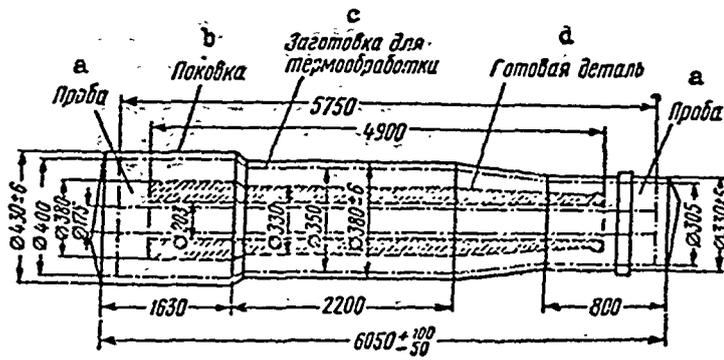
Forging and stock for heat treatment and finished inner tube of built-up barrel
